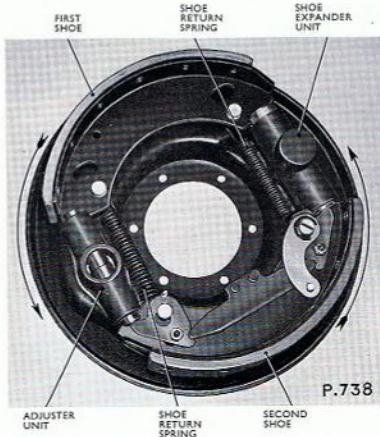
Front view of the KAL.30 and KA.40/60 left hand (near-side) rear brake assembly. Arrows indicate the direction of drum rotation
